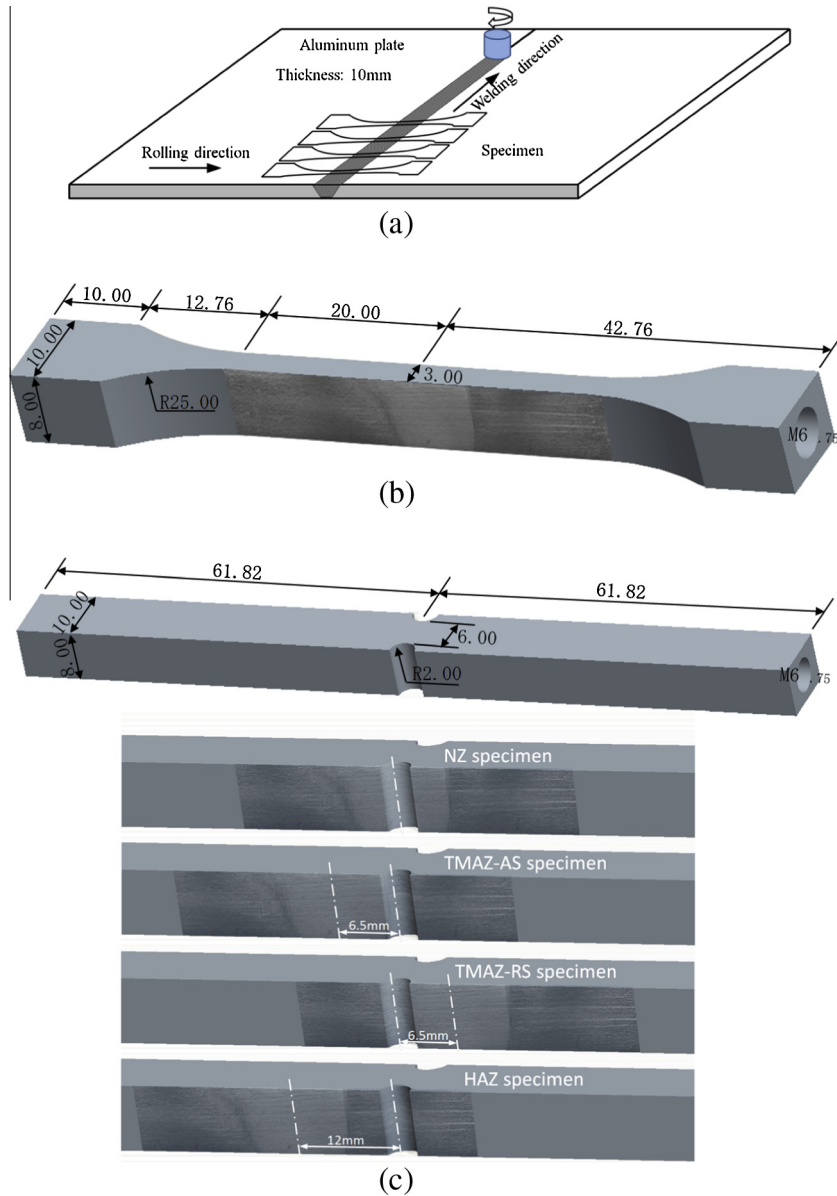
Specimen design of the FSW joint in this test. (a) Location of full specimens on the FSW jointed plate; (b) dimensions of full specimen in ultrasonic fatigue test; (c) schematic illustration of the subzone specimens across the weld.
